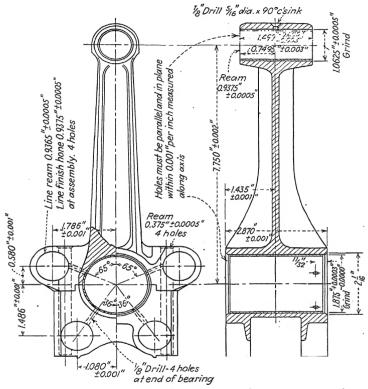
LeBlond five-cylinder radial-engine two-piece master-connecting-rod assembly.
